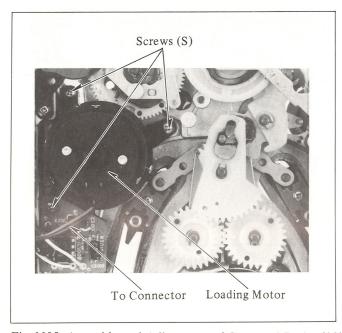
Assembly and Adjustment of Gears and Rods—(12)
